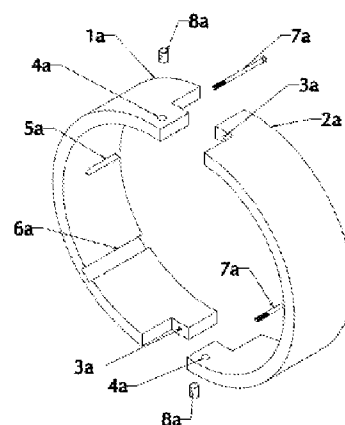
Exploded view of the Bead lock for bias(tube) tire
